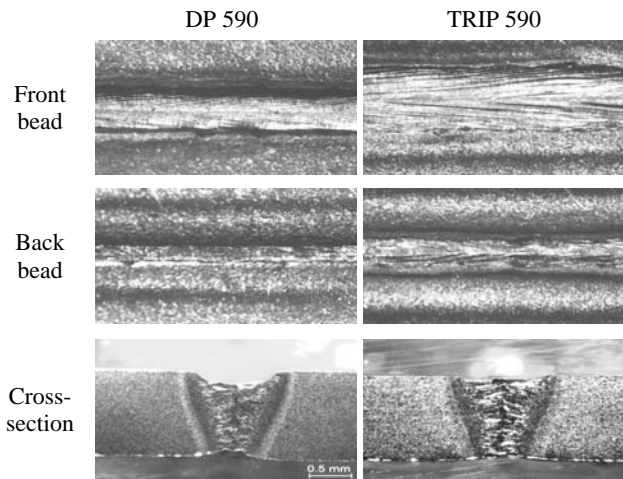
Weld bead shapes for DP 590 and TRIP 590 steel
